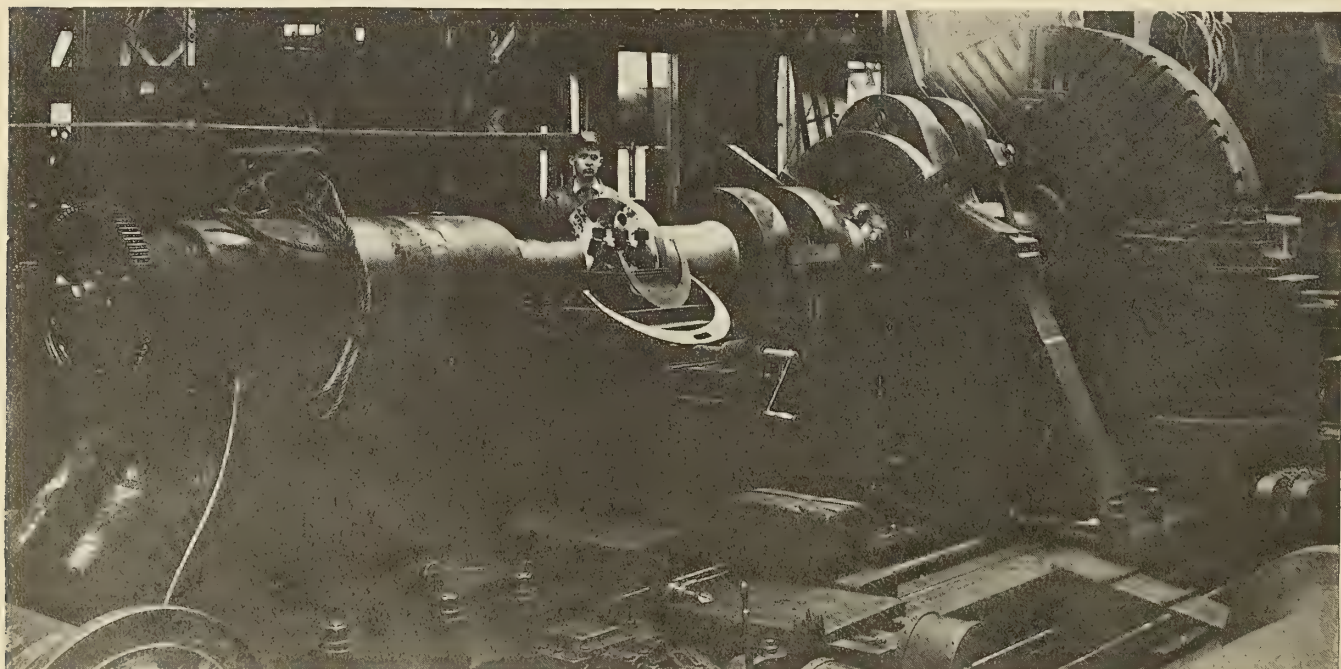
Two Sections of Crank Shaft Assembled and Set Up in Lathe Where It Is Turned to Exact Gage Sizes
